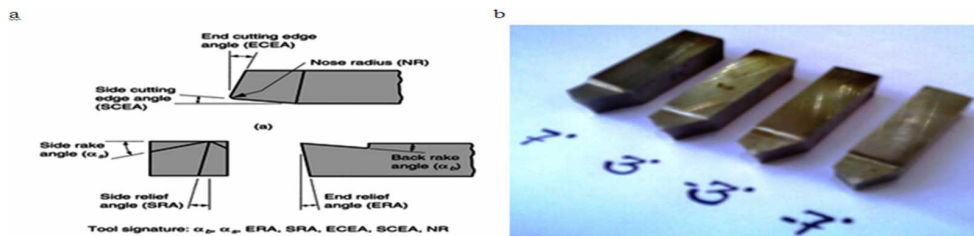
(a) Tool geometry of Cutting tool; (b) Cutting tools with rake angles.
